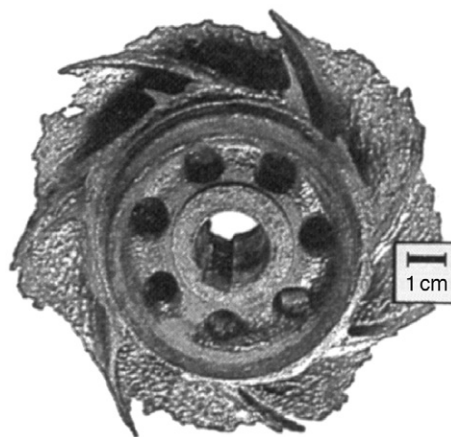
Erosion corrosion and cavitation corrosion at pump impeller (cast duplex stainless steel).
